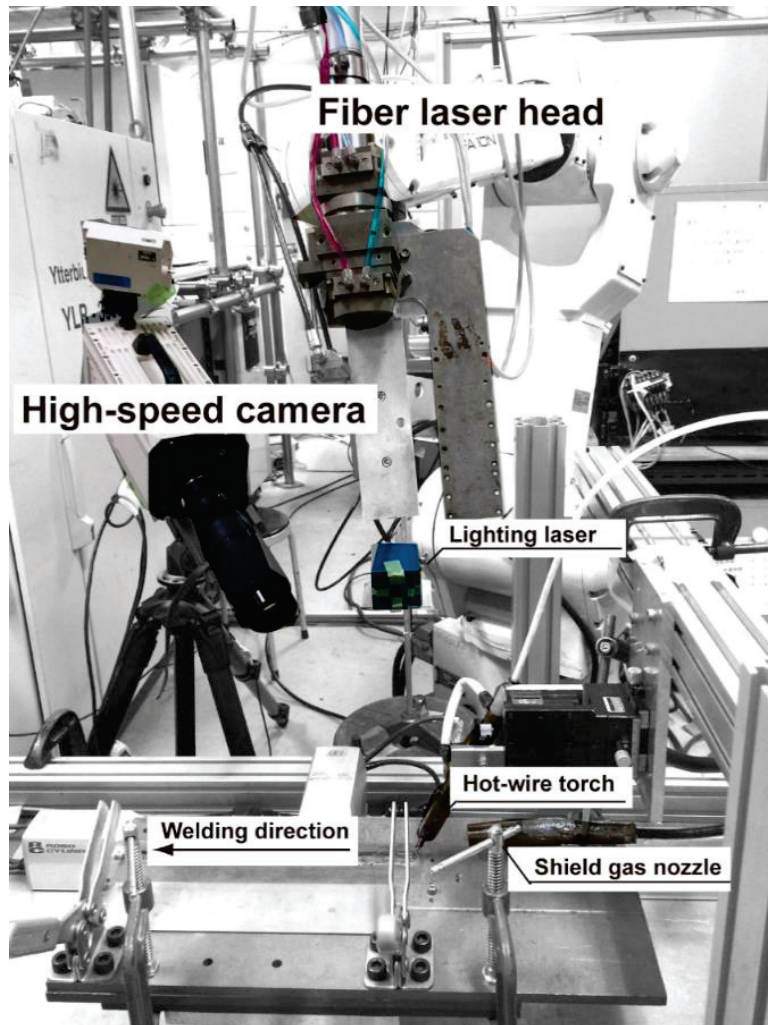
Experimental set-up for Hot-wire Laser welding
